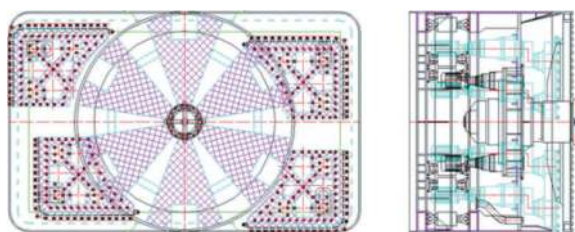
Drawing of cutter head and driving structure of pipe jacking machine.
